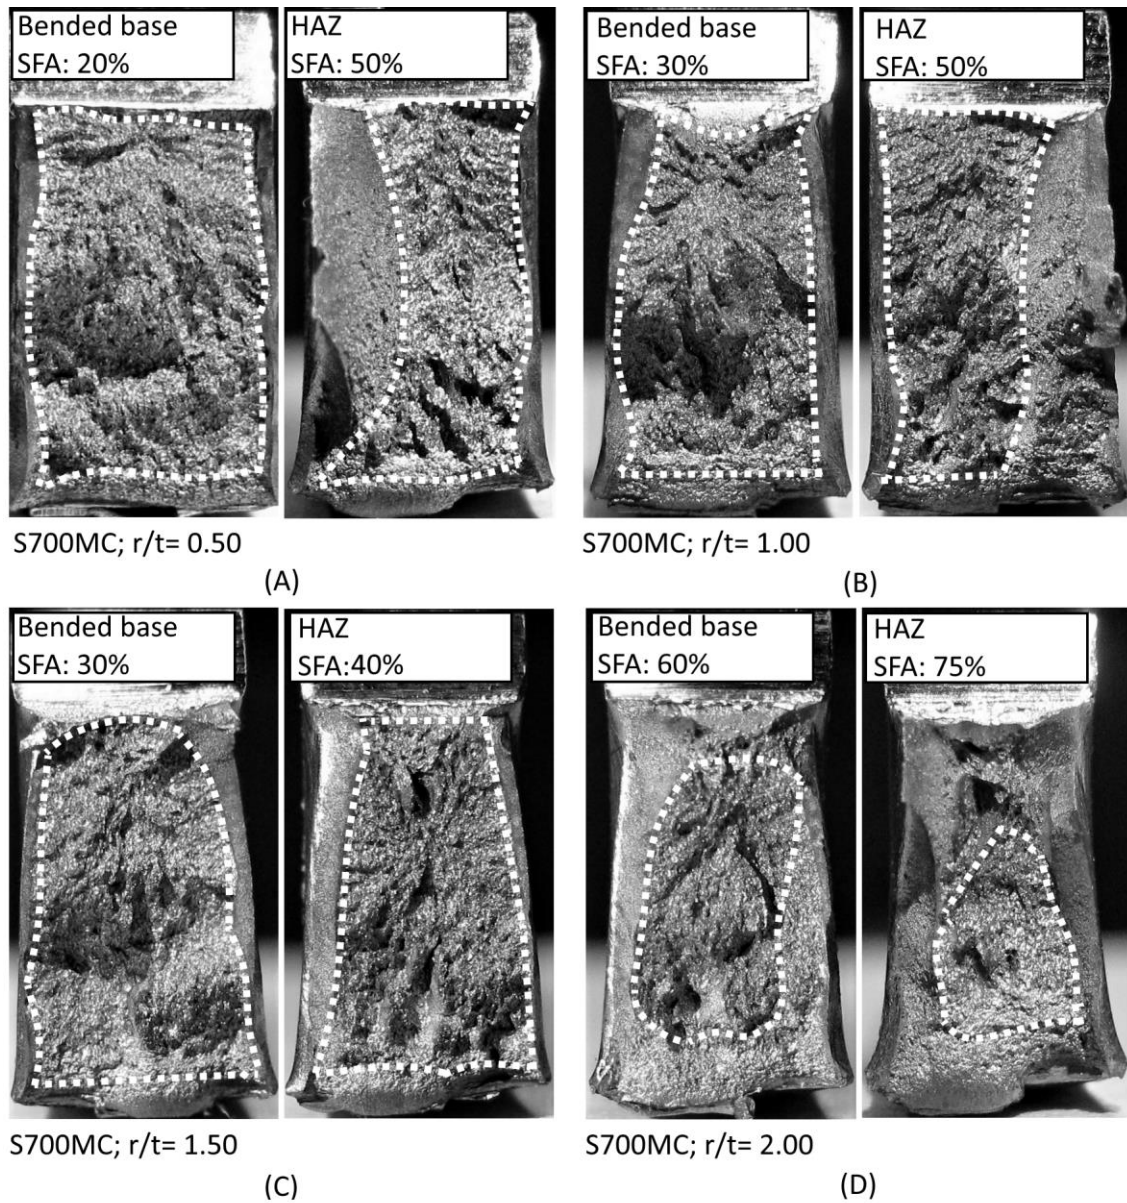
Fracture surfaces and their SFAs for the bended sides of the welded joints made from S700MC, according to their bending radius: (A) $r = 5$ mm, (B) $r = 10$ mm, (C) $r = 15$ mm, (D) $r = 20$ mm. Brittle fracture areas are inside the white dashed boundaries.
